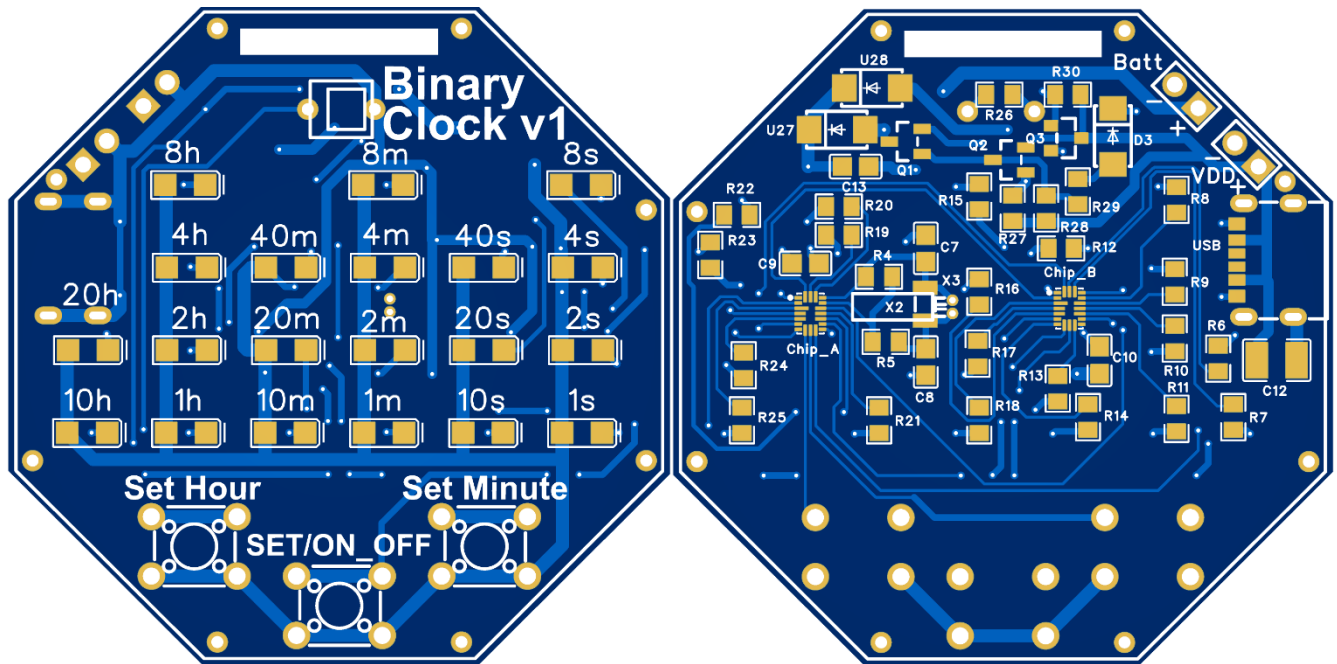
Top and bottom side of PCB for Binary Clock (Binary-coded decimal version)
